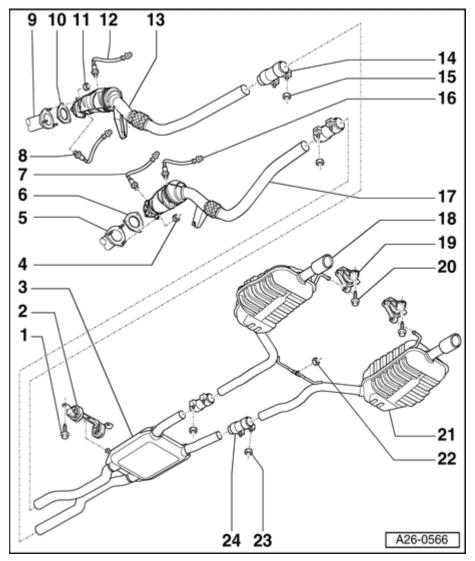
Exhaust System Components, Overview, (Vehicles With All Wheel Drive) Courtesy of VOLKSWAGEN UNITED STATES, INC.
